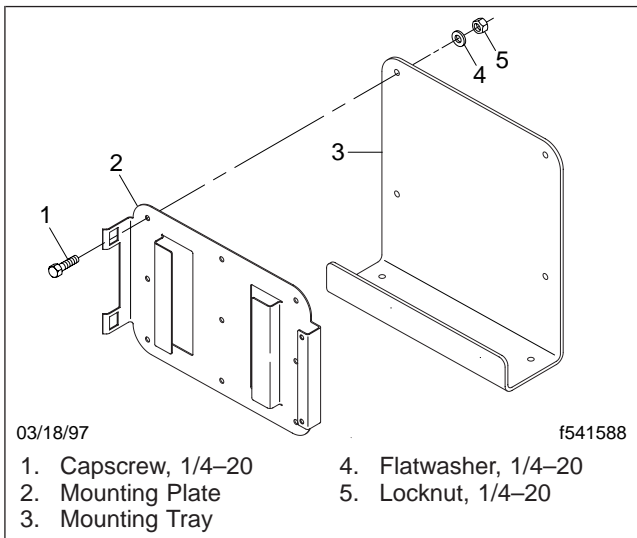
, Removing the Mounting Plate from the Mounting Tray
